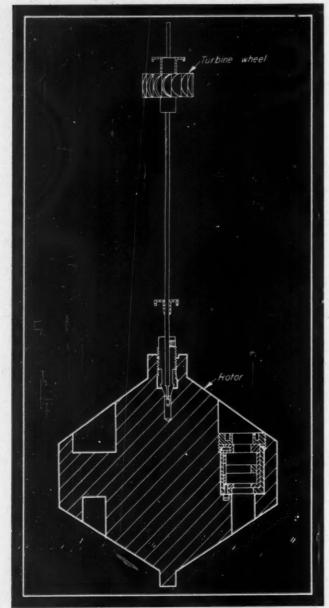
Air pressure at 5 psi, acting on underside of air turbine wheel, supports this rotor for an 80,000-rpm centrifuge.—Drawing, courtesy The Sharples Corp.
